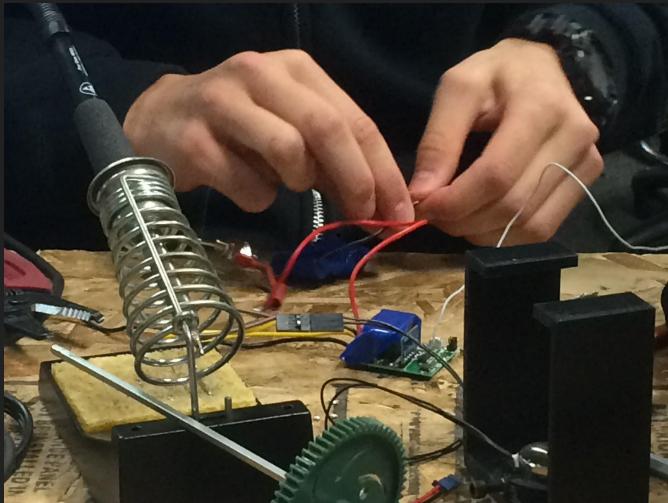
Jacob soldering on stronger gauge wires to boost Converter
